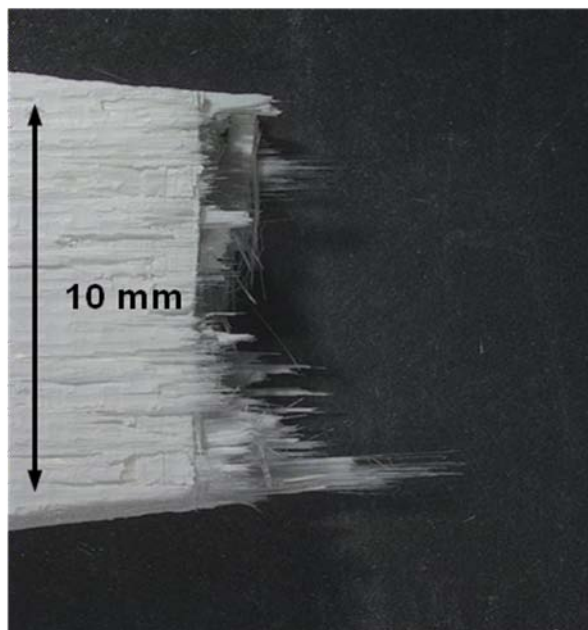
Fracture surface of the N720/AM specimen(2) tested in tension to failure with constant loading rate of 25MPa at 1100°C in steam.
